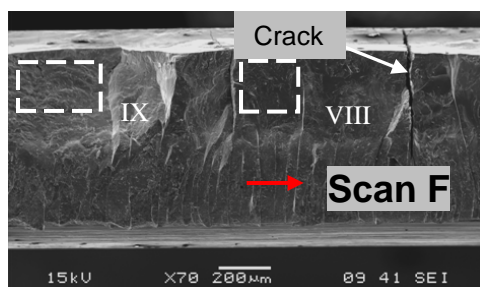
Fracture surface (SS-side, typical). Note different morphologies in upper and lower sections.
